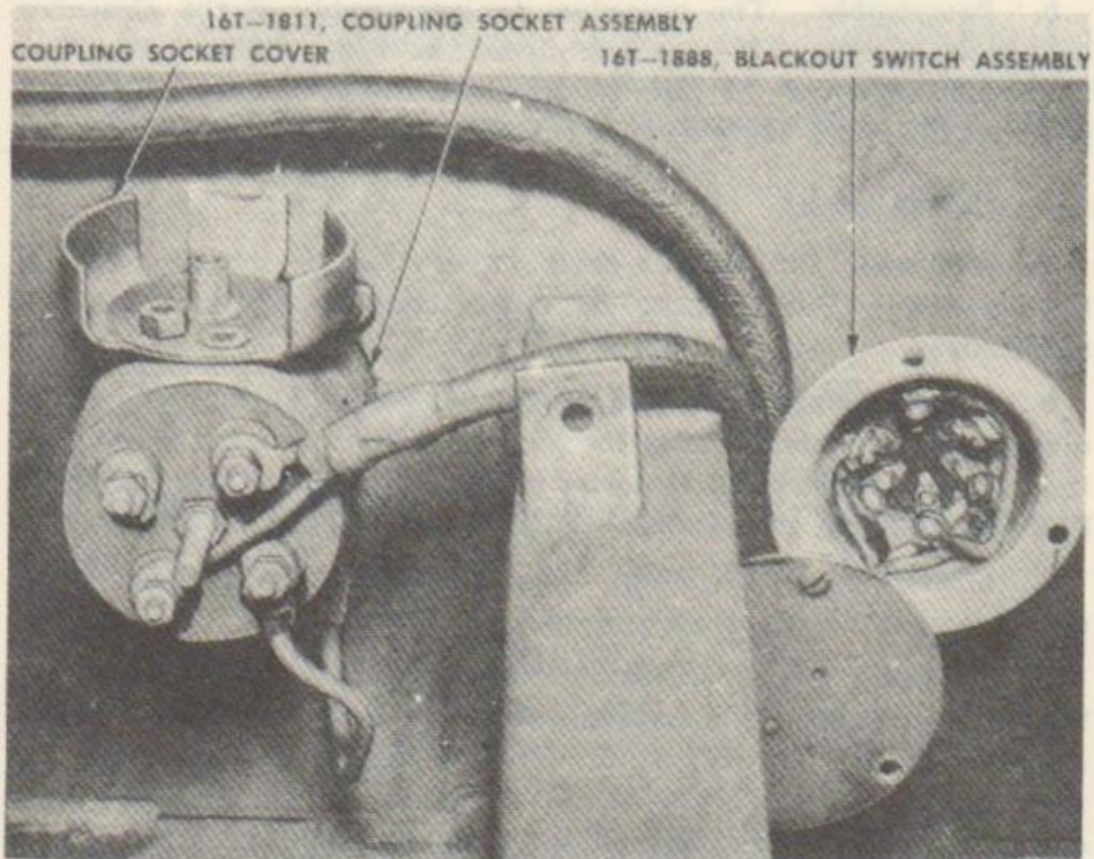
COUPLING SOCKET AND BLACKOUT SWITCH
